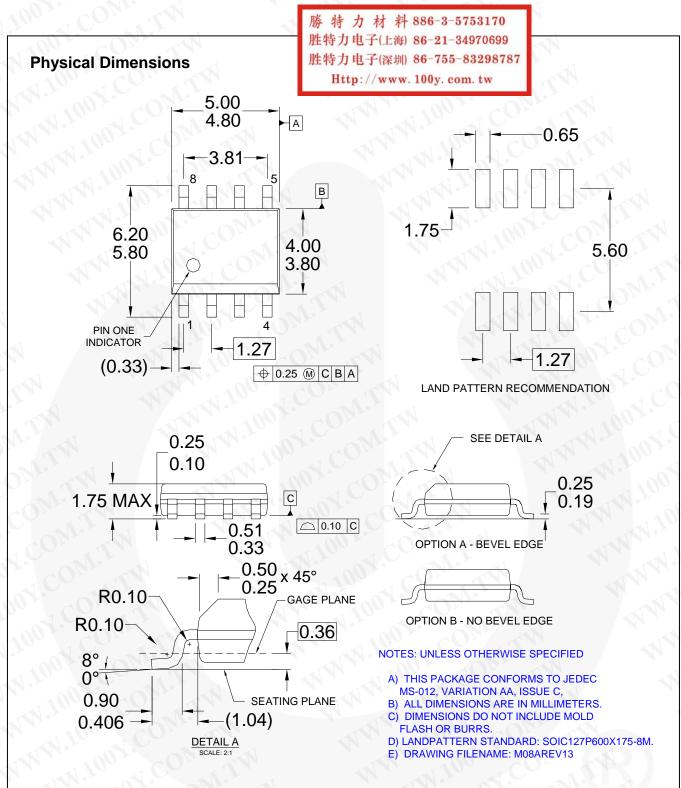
8-Lead, Small Outline Package (SOP-8)
